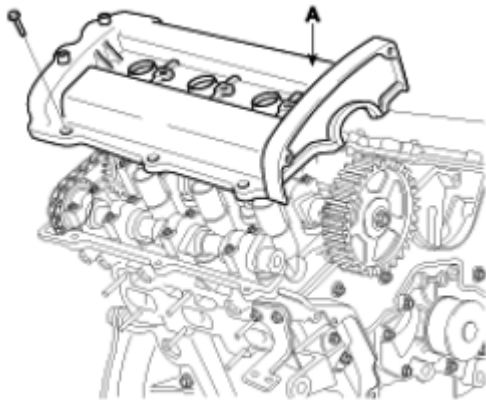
Identifying Cylinder Head Cover With Mounting Screw
